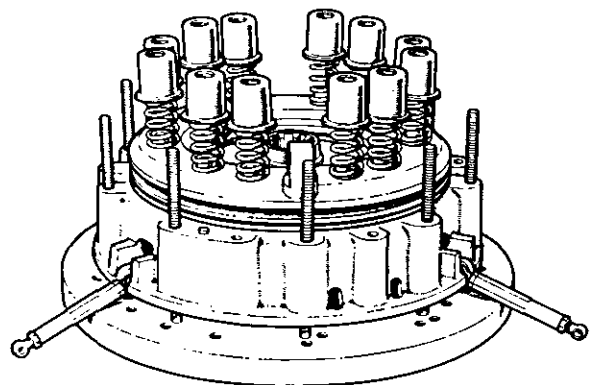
ASSEMBLING TRANSMISSION CLUTCH
